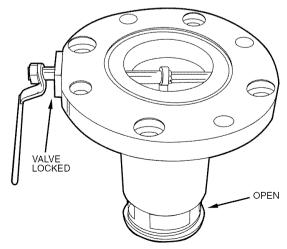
B — Suction Service Valve Locking Device, Open and Locked
